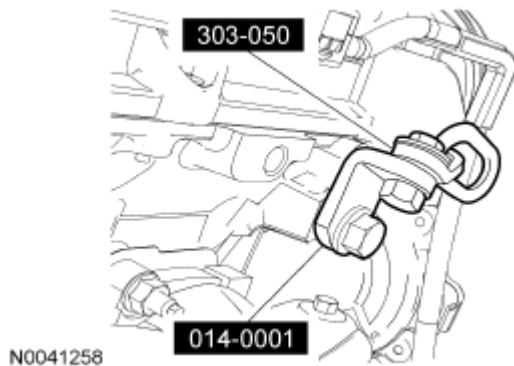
Identifying Special Tools (303-050 And 014-0001)
